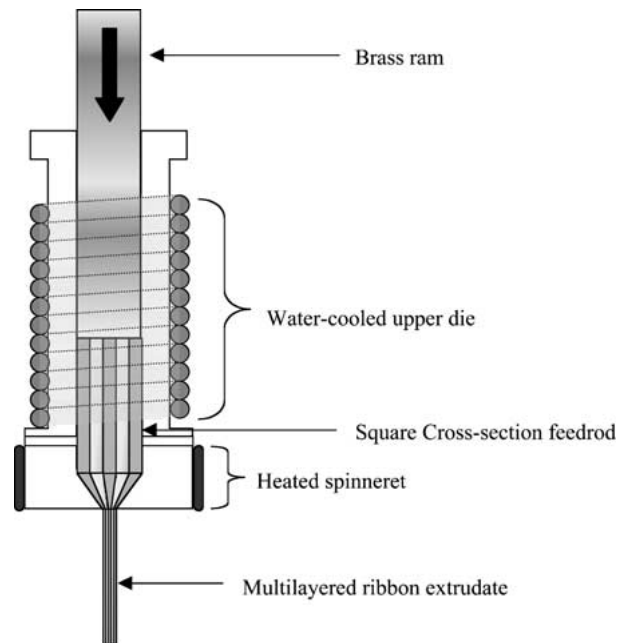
Schematic of extrusion die used to coextrude multilayer feedrod.
